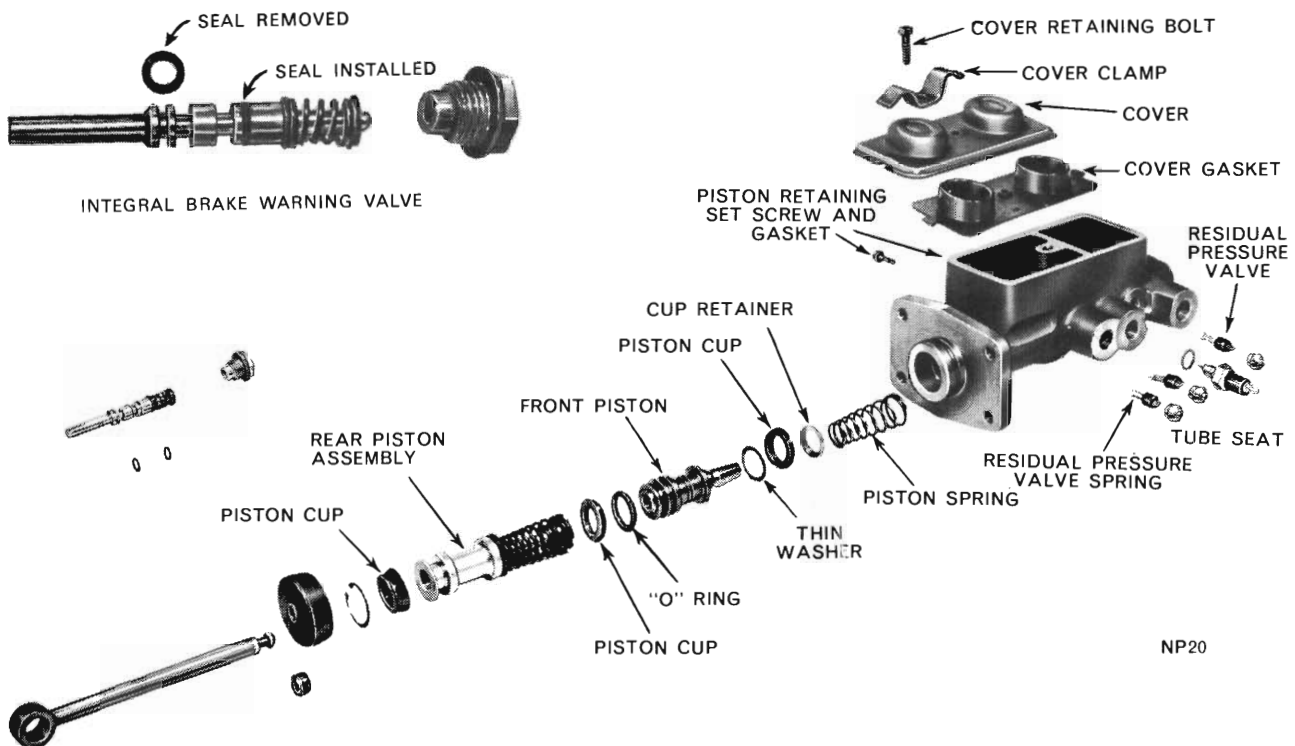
Tandem master cylinder (disassembled view) — typical assembly.
